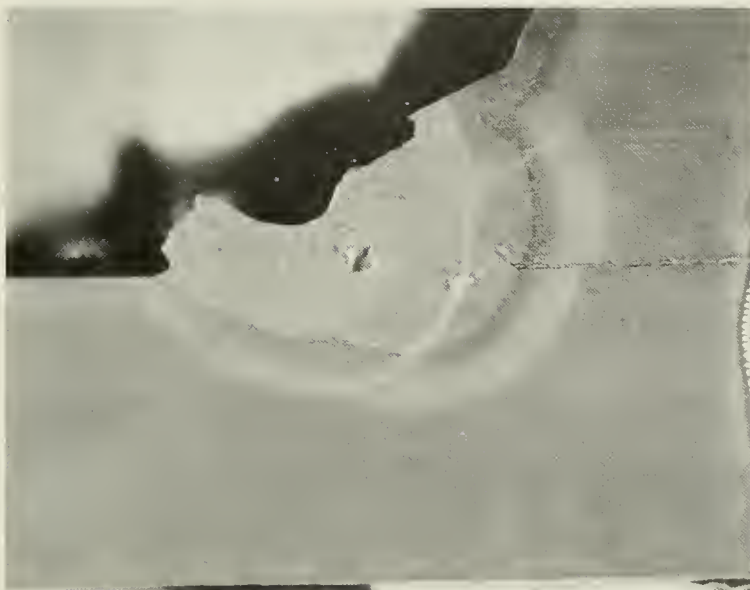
MULTI-PASS OVERHEAD UNDERWATER WELDED LAP JOINT #4
